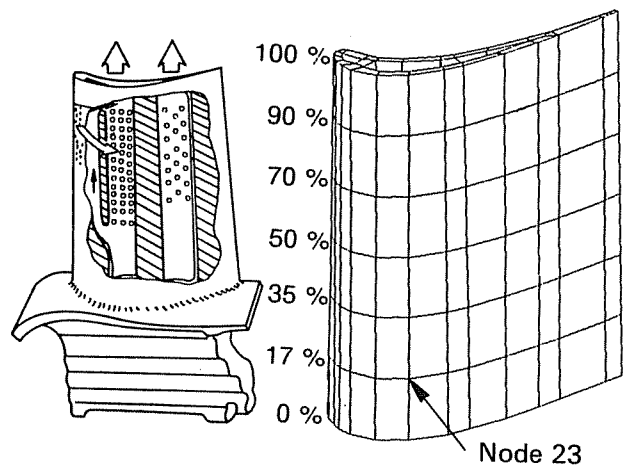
Geometry and finite element mesh of the turbine blade.
